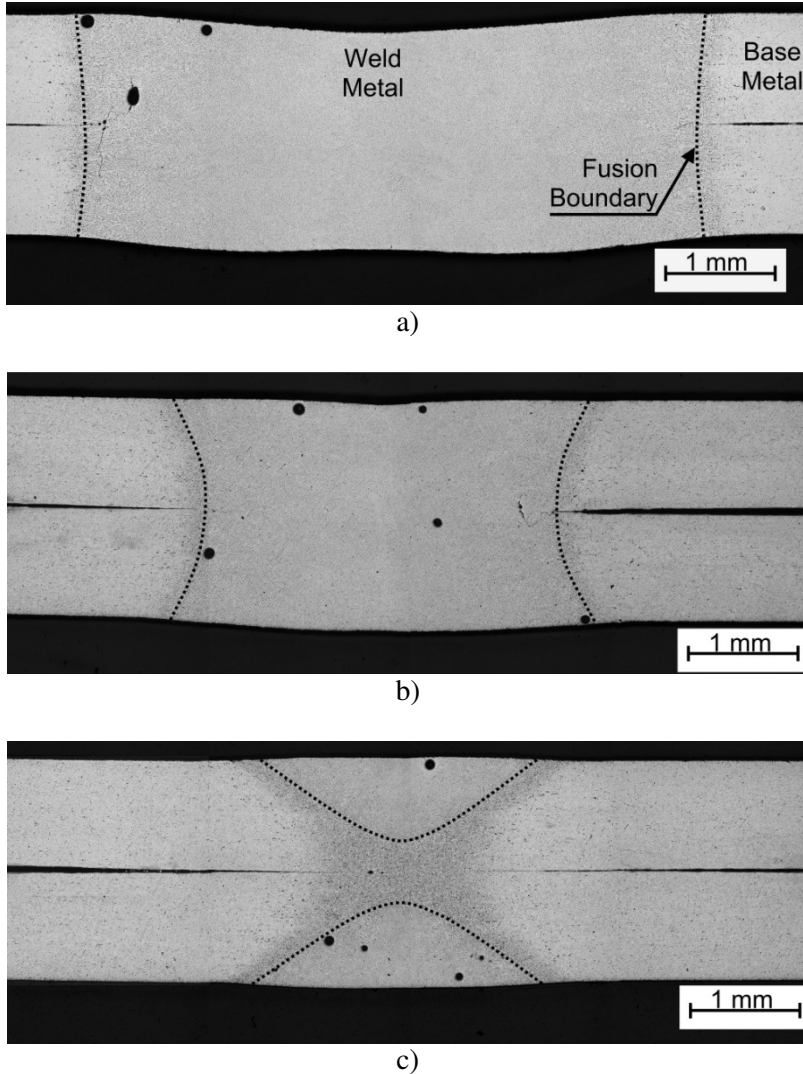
Transverse cross sections of welds produced at a total welding power of 2 kW and welding speeds of: *a)* 10 mm/s; *b)* 15 mm/s; *c)* 20 mm/s.
